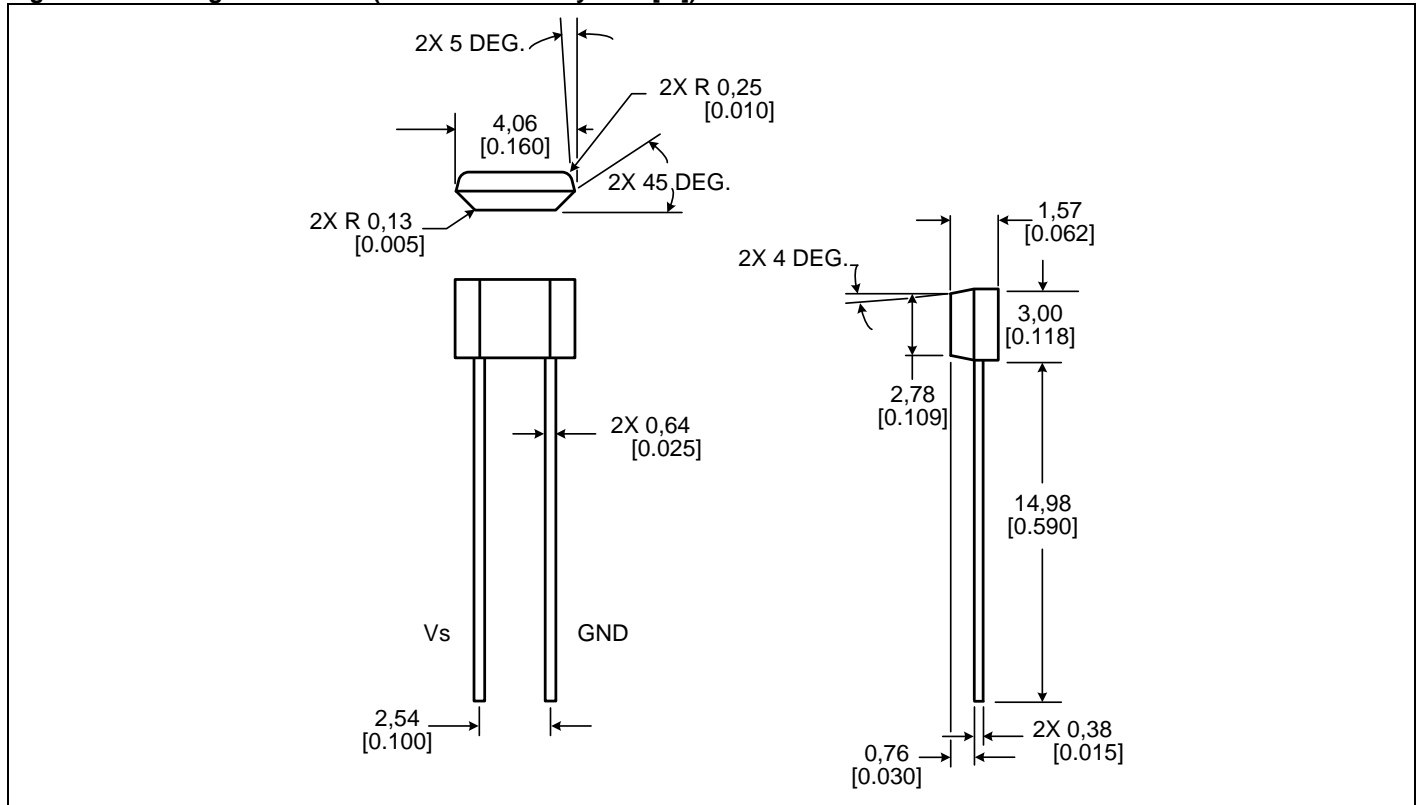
Mounting Dimensions (For reference only. mm/[in])
